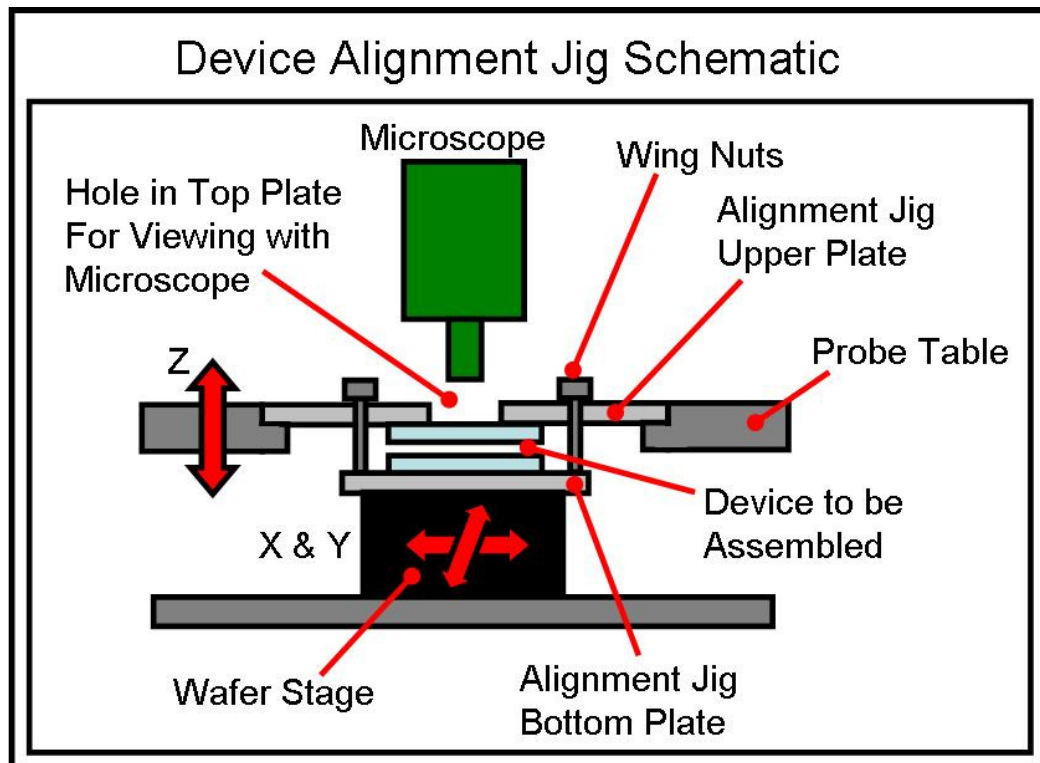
Schematic showing elements of the alignment jig used to align and assemble the two wafer halves that form the final device.
